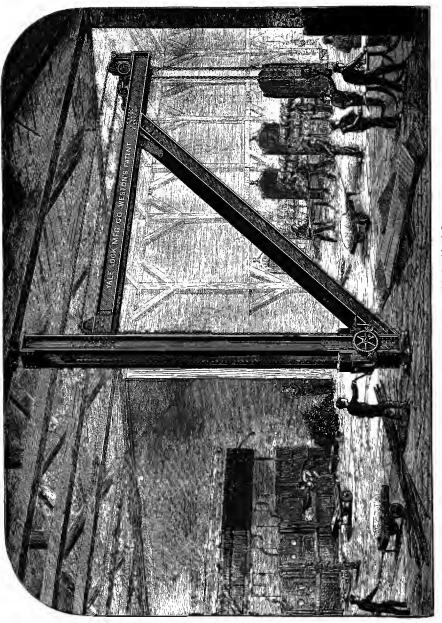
Jib Crane, with Separate Trolley Gear.
